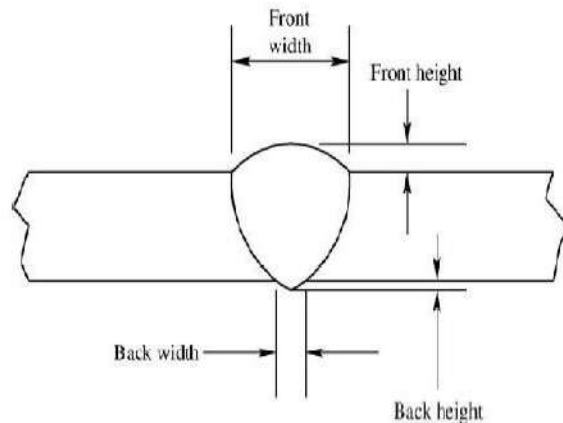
Schematic diagram for weld bead geometry [9]
